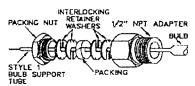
Part No. FTG13A-600R packing nut assembly.
